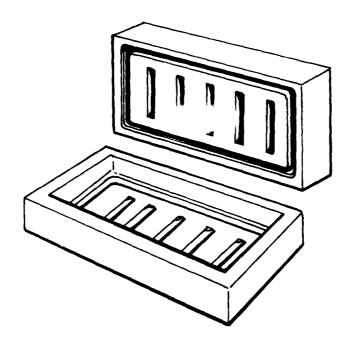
TYPICAL KIRKSITE BEADED PANEL DIES.
